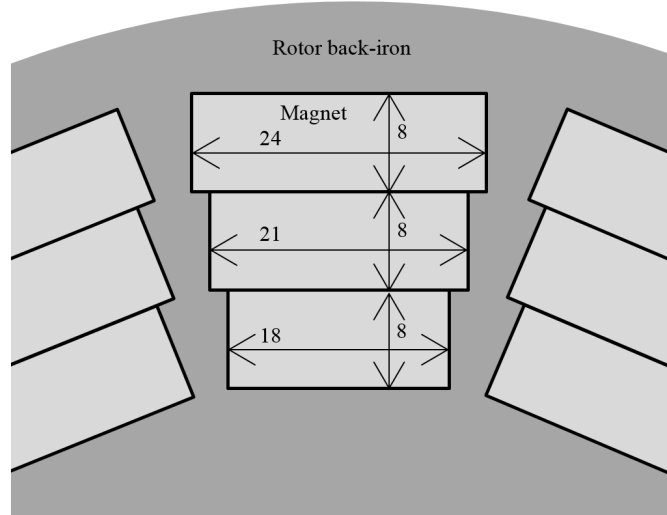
Dimensions of the PM lay-out of the example AFPMSM in millimeter.
